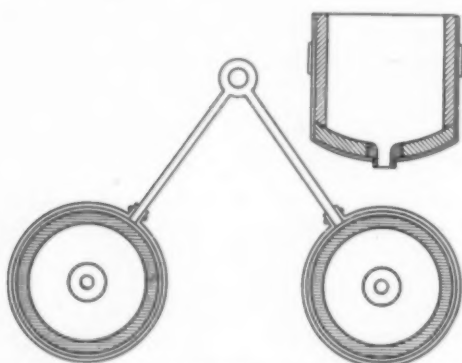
Cylindrical Pot or Tun-dish for use when casting on Carriages.
